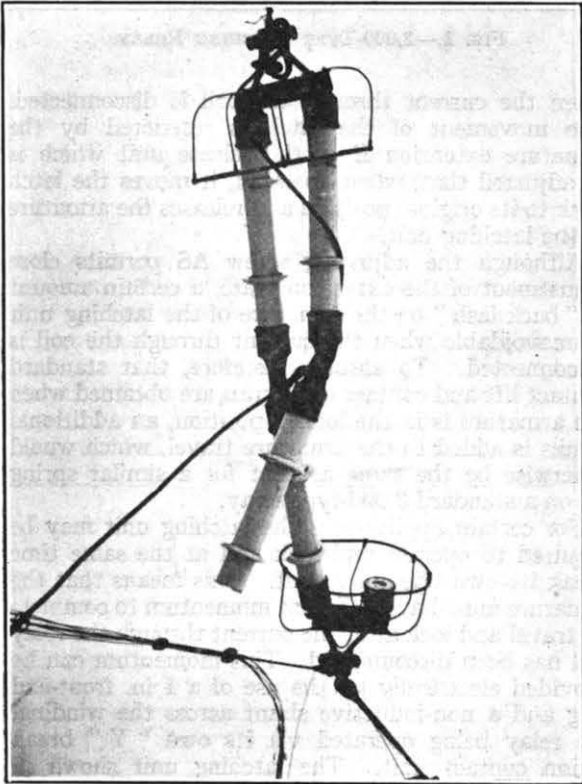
BROKEN MAIN INSULATOR ASSEMBLY.
